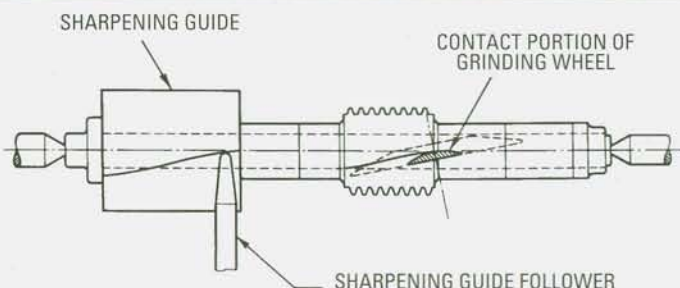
For sharpening hobs with helical flutes on a cutter sharpener, a guide bar with grooves of the same helical lead is required.
